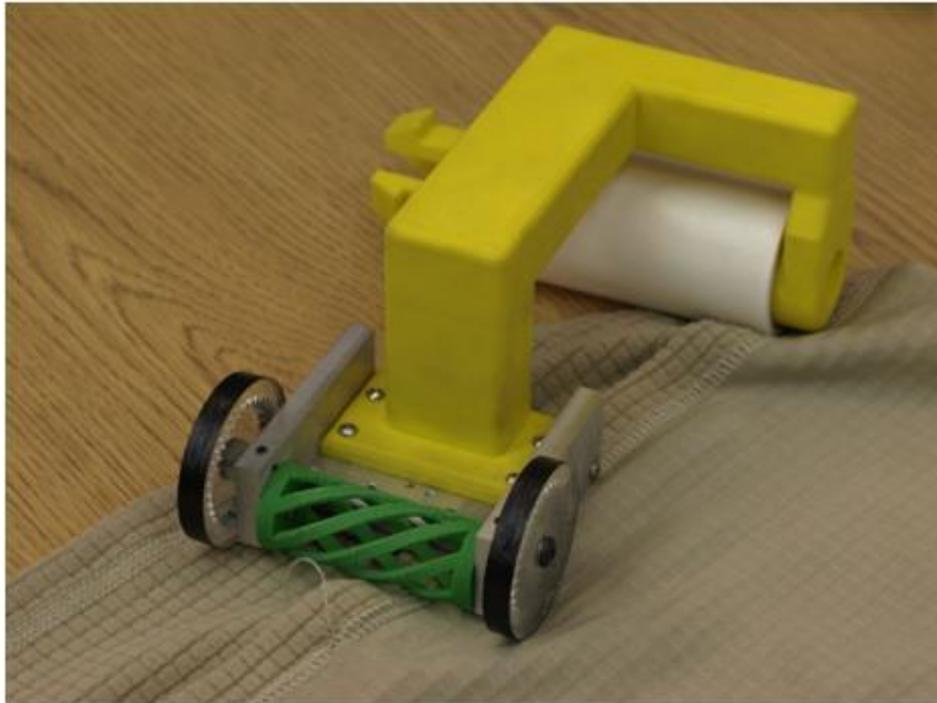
Final Prototype of the "Push Mower" design for thread trimming.
